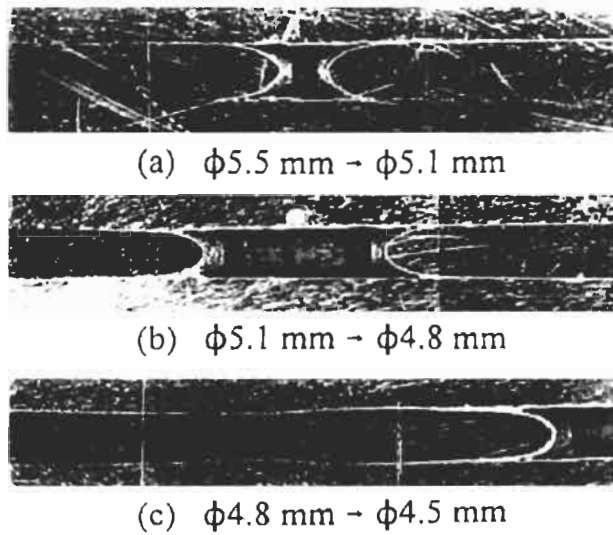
Internal fracture found during clad wire drawing ($\alpha = 20^\circ$).
